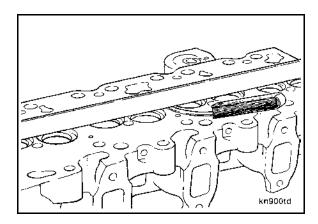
MEASURE THE CYLINDER HEAD COMBUSTION SURFACE
